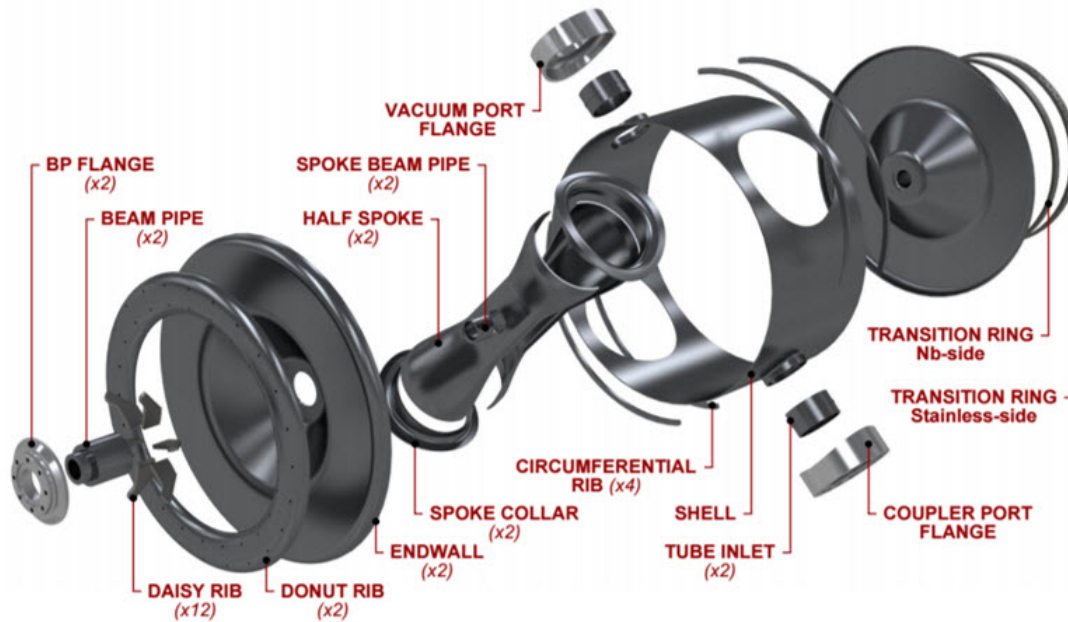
Exploded view of the bare niobium SSR1 cavity.
